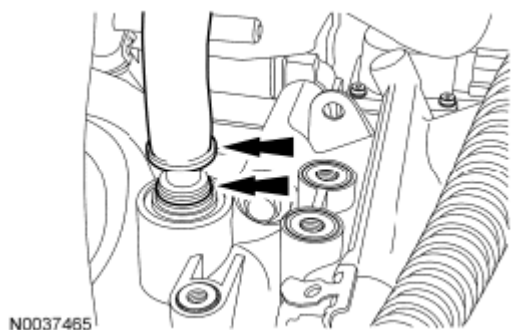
Locating Locking Ring & Brake Booster Vacuum Supply Tube
